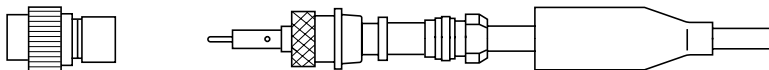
(6) Assembly of Coaxial Cable Connector
